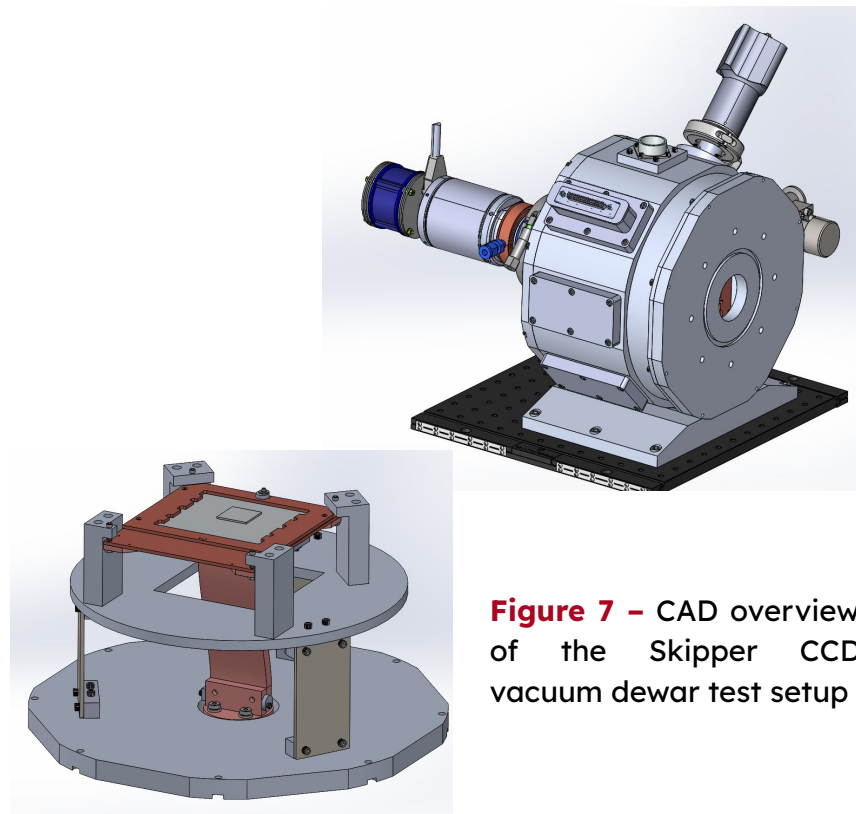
CAD overview of the Skipper CCD vacuum dewar test setup
